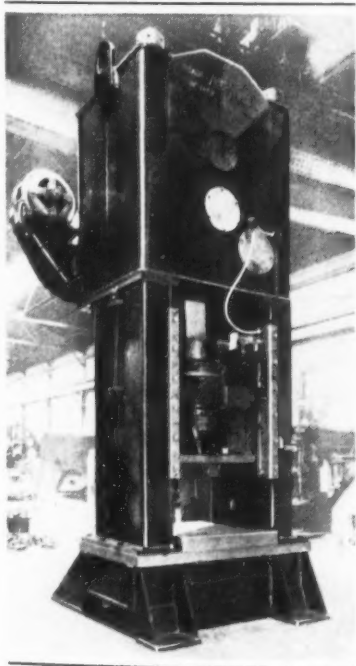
Press with Eccentric instead of Customary Crankshaft
